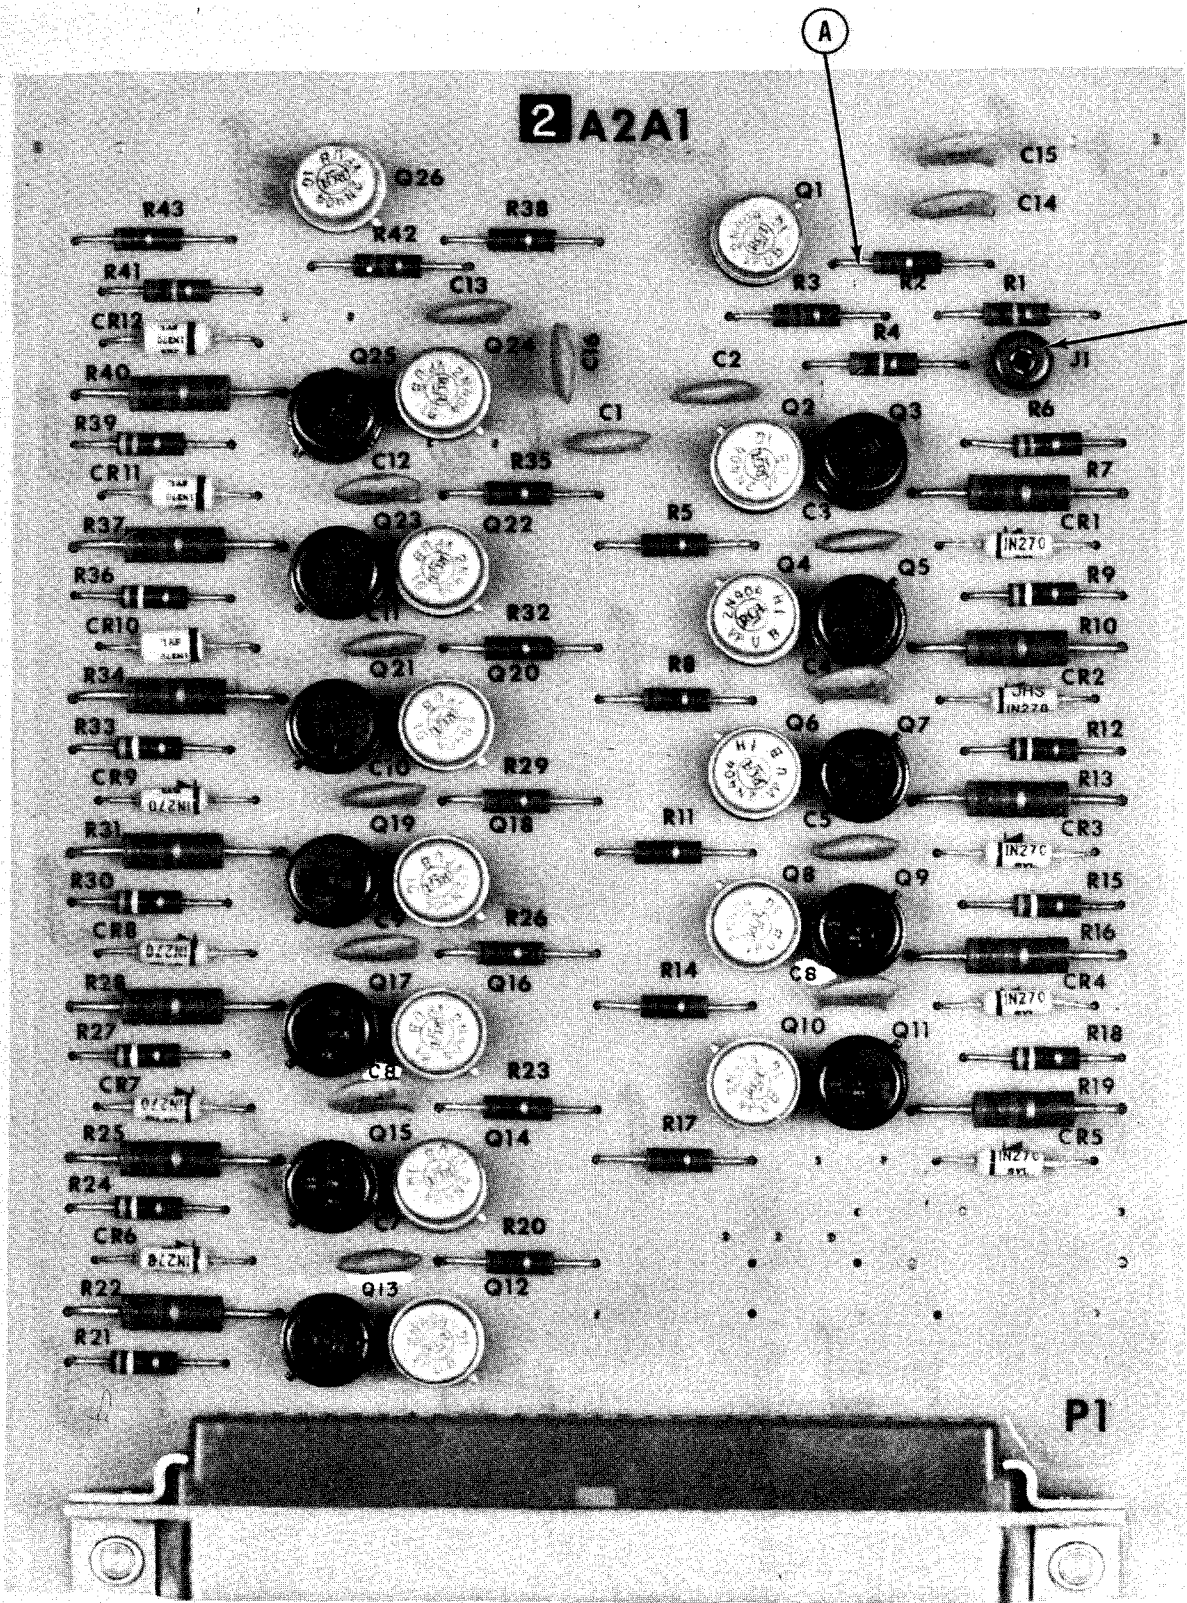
Mux-Demux, Printed Circuit Board A1
